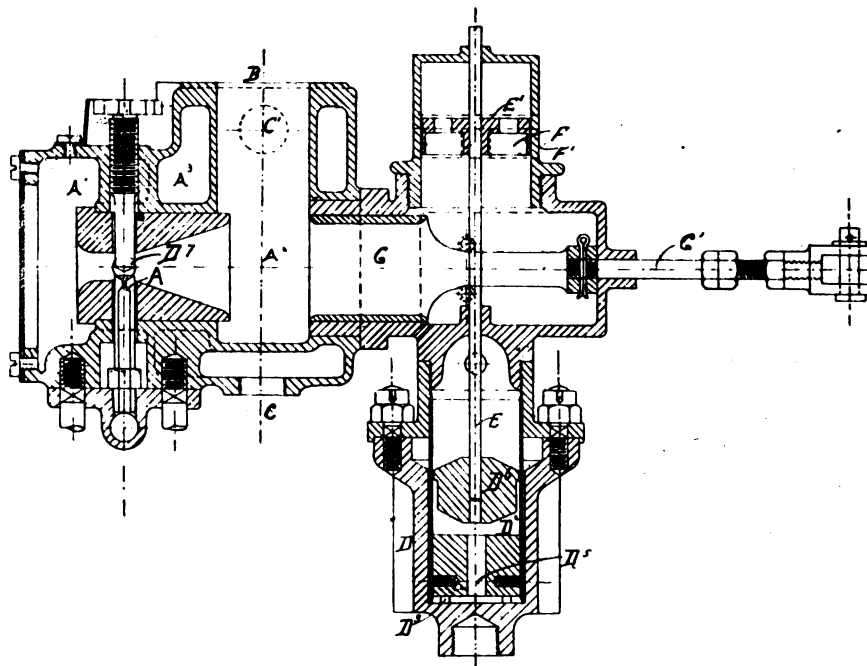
Section of "Xenia" Automatic Carburettor.
